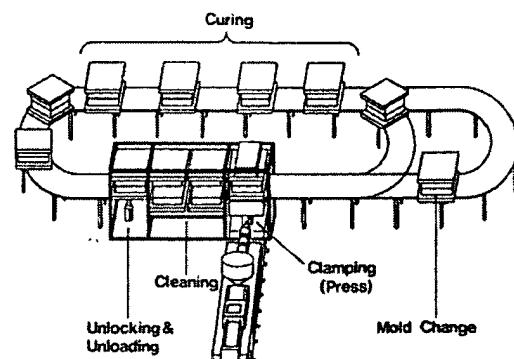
Schematic of the IMPCO Trak molding machine.
